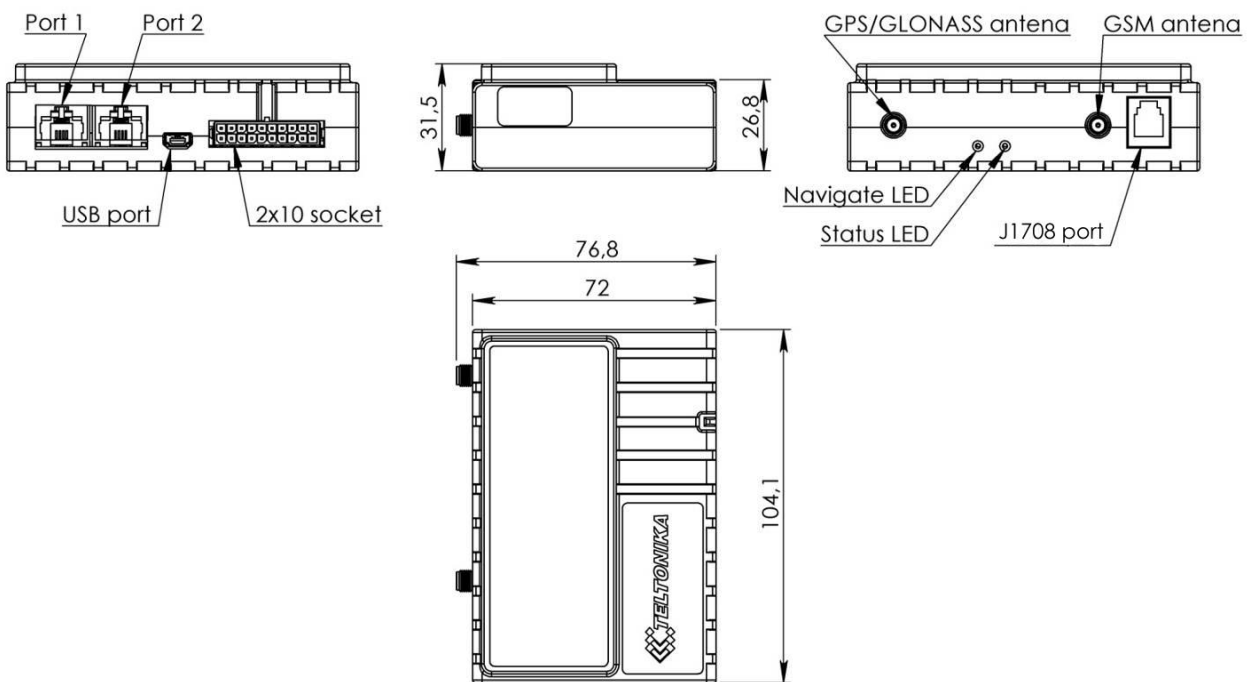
FMB640 view & dimensions in mm (tolerance ±2mm)
